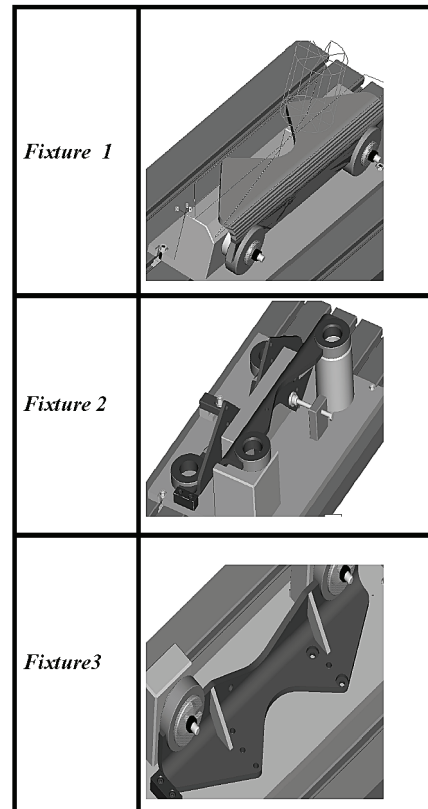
Preliminary design of fixture and technological process for brace of engine.
